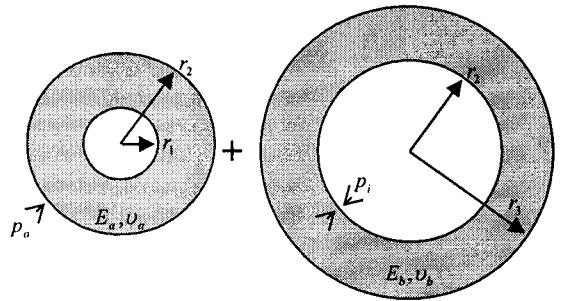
Contact pressure acting equal on both gear and shaft by the shrink fitting process
